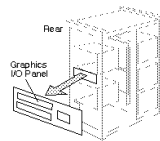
Rackmount Chassis Component - Graphics I/O panel
